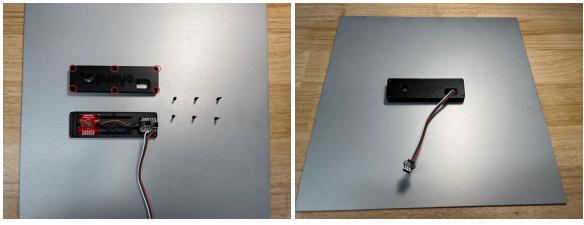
Locations and fasteners necessary to assemble the electronics enclosure
